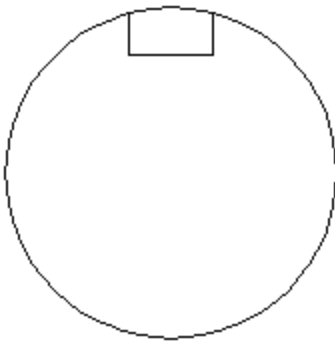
illustrates a 1/4" wide keyway in a 1" O.D. shaft. Side view not available. Insertion point is the center of the shaft diameter. Tool & Die Helper For AutoCAD LT will draw shaft diameter.
